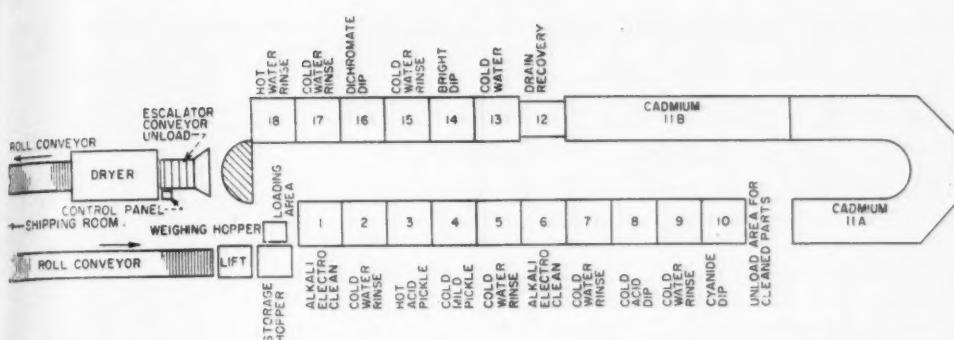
Layout of Bellevue's cadmium plating line shows how parts arrive and depart on conveyors located together at one end of the machine. Speed-up in materials handling results from elimination of storage at dispatch room and plating line.
